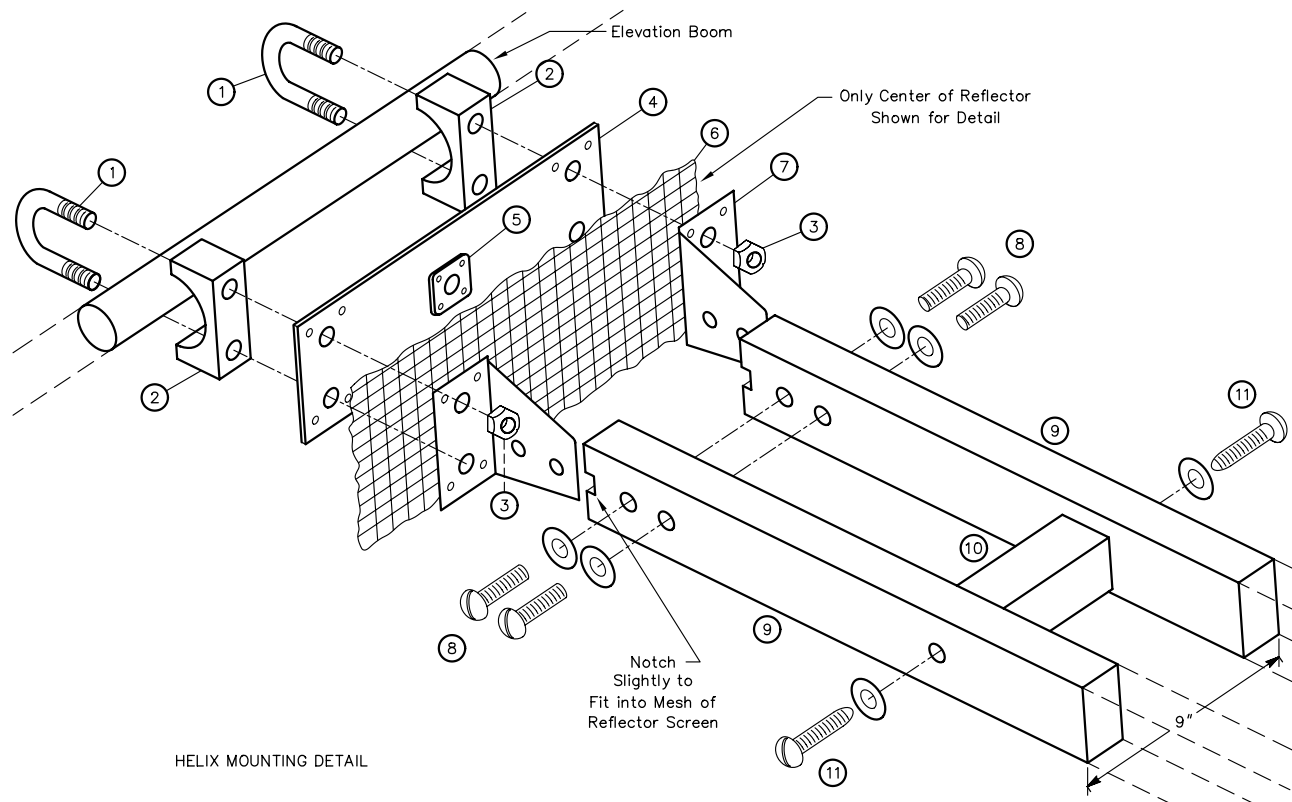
The details of the helix mounting arrangement. See Table 2 for a number-keyed parts list.
